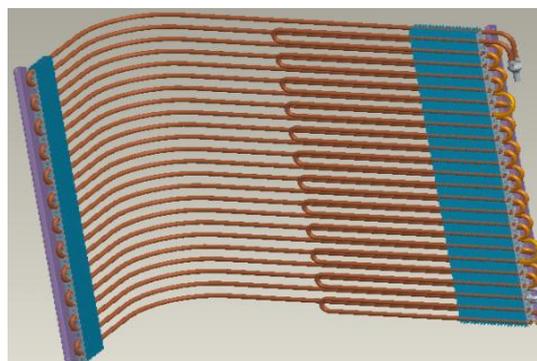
Typical Plate Finned-Tube Heat Exchanger
